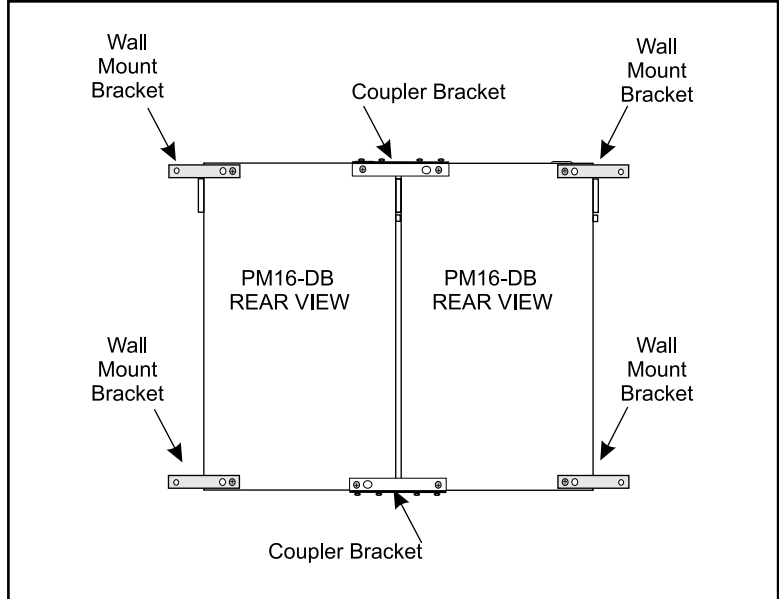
Coupling and Surface Mounting Two PM16-DB Port Modules
